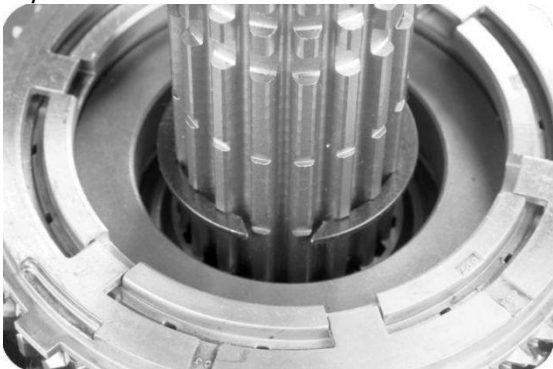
JS 7-1 series transmission two shaft assembly parts break down
